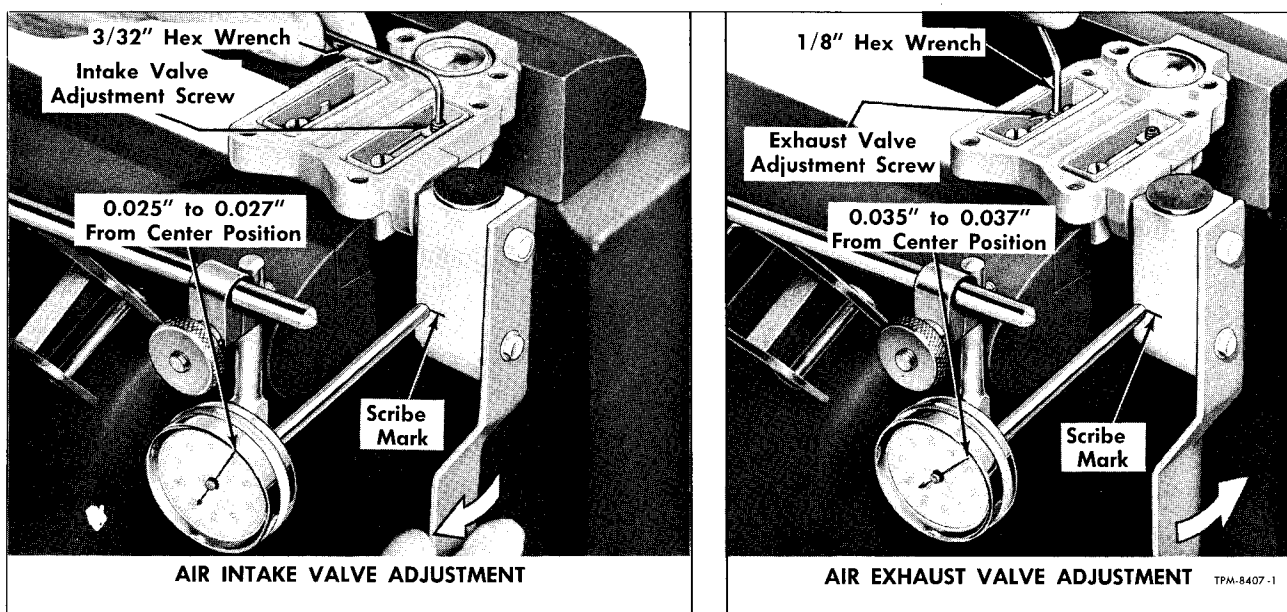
Method of Adjusting Air Valve Lever Gaps (Front Shown)
